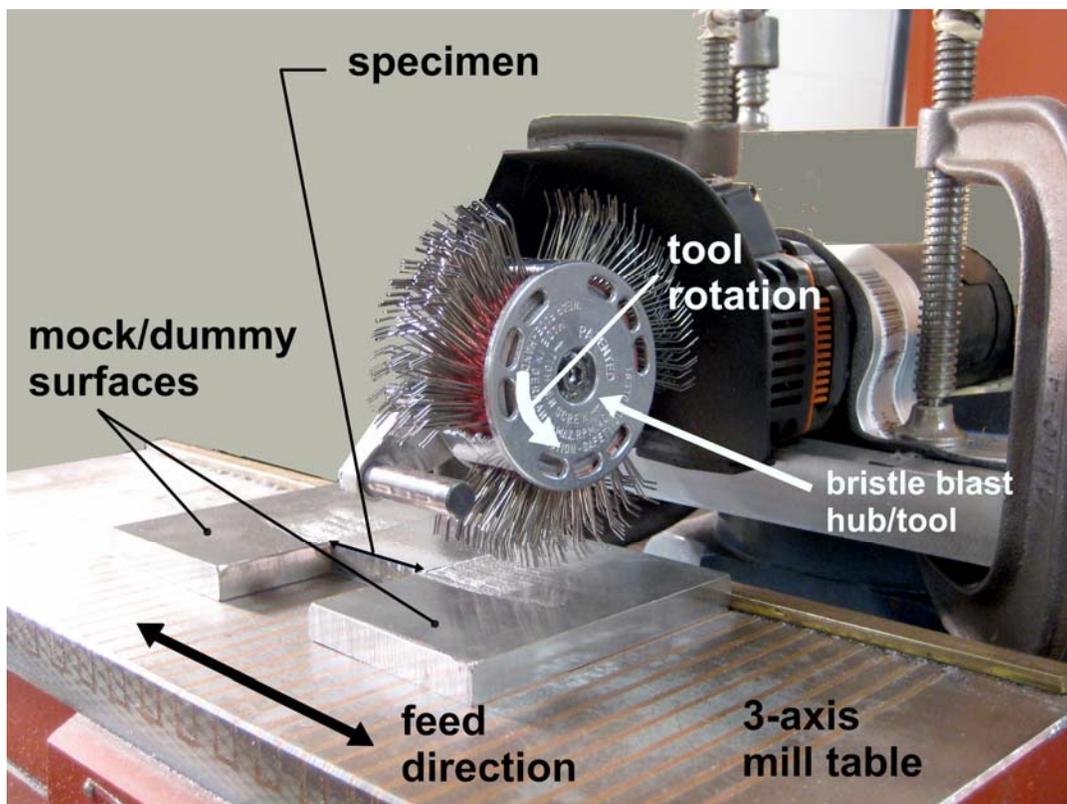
Experimental set-up of 3-axis mill used for material removal measurement studies.
